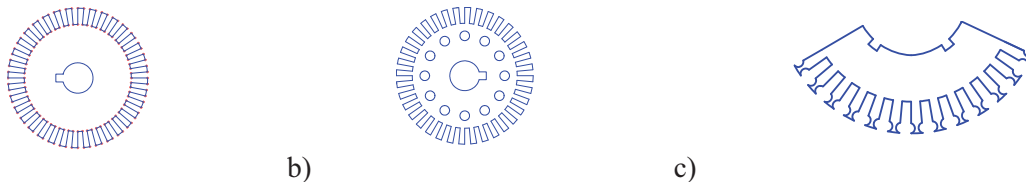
Thin-sheet electric steel parts: a) armature sheet; b) rotor sheet; c) generator stator sheet segment
